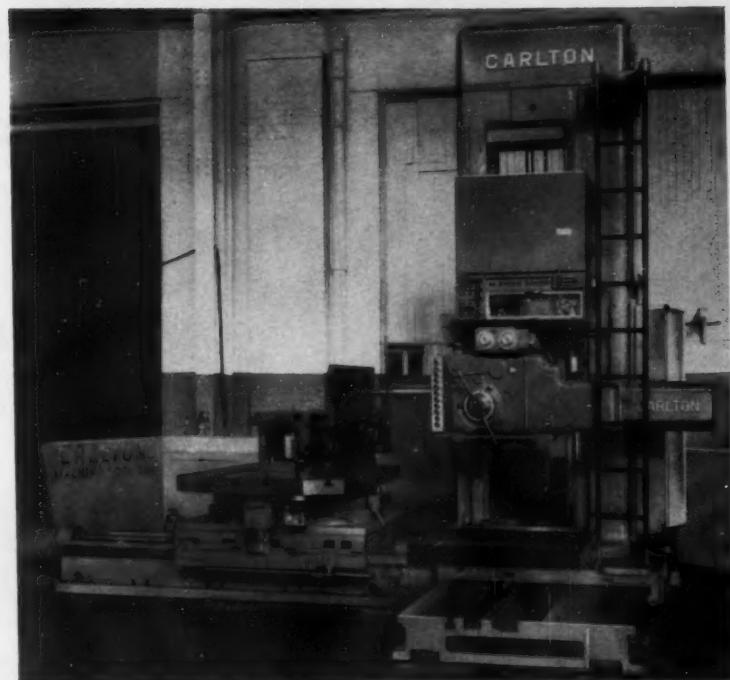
Carlton horizontal boring and drilling machine with numerical control
